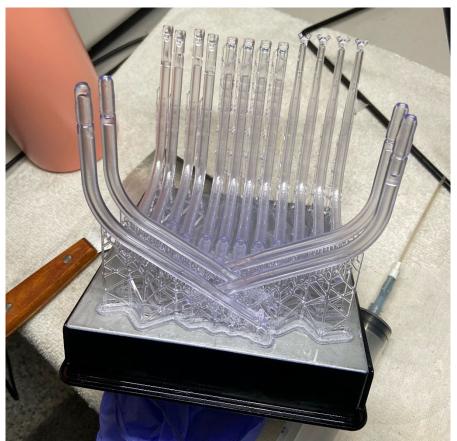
A printed set of shower head designs. The shower heads are printed in biocompatible resin using PreForm and the Form 3B.
